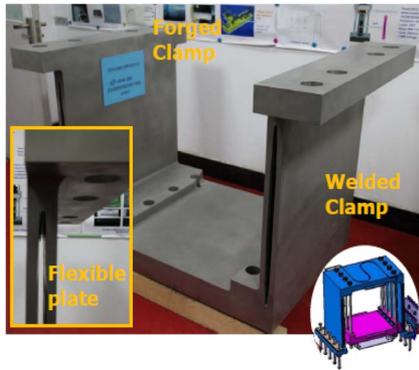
PF5 U-shapes clamp with flexible plates (3-D model and prototype—courtesy of CNDA).
